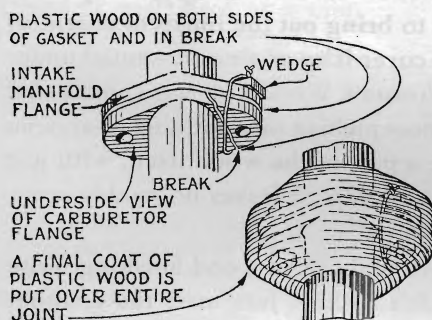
An emergency repair of a broken carburetor flange, using composition wood to patch.
